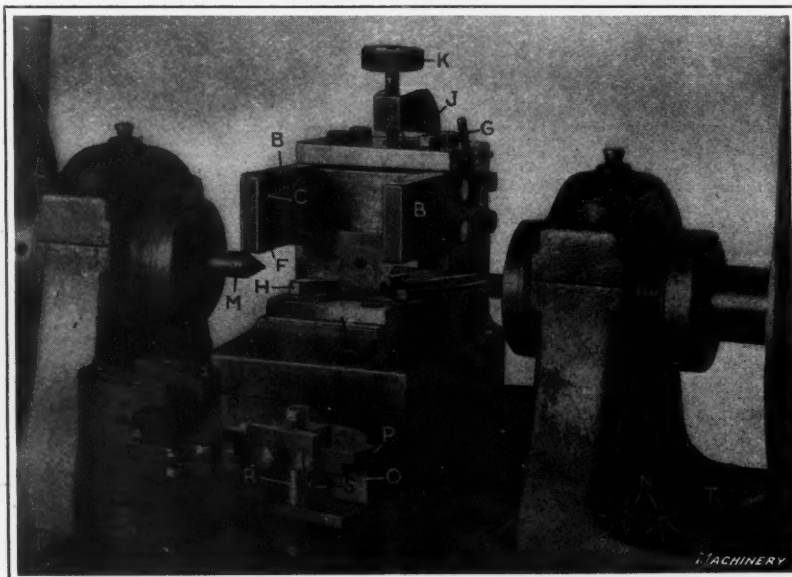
Fixture in which the Chuck Bodies are held for finishing the Operating Screw Recesses
